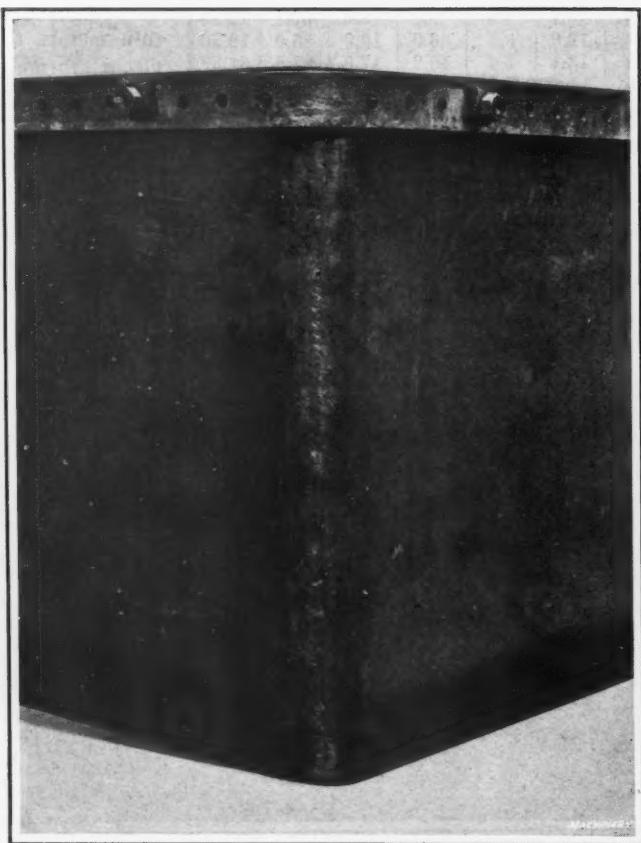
Tank with Welded Seam, which has been ground Smooth
